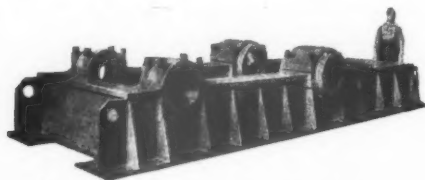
ALL-STEEL GEAR REDUCTION HOUSING
